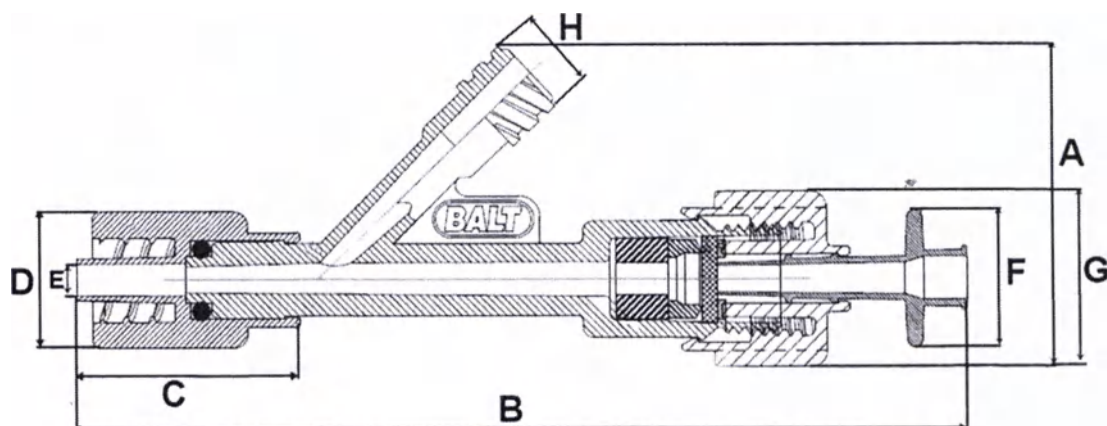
Dimensions of RYVA.LUER Sterile Disposable Y-Shaped Connector with Two Adapters
